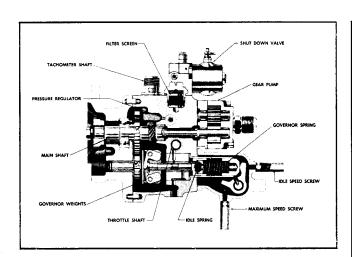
Flange-mounted fuel pump with variablespeed governor
